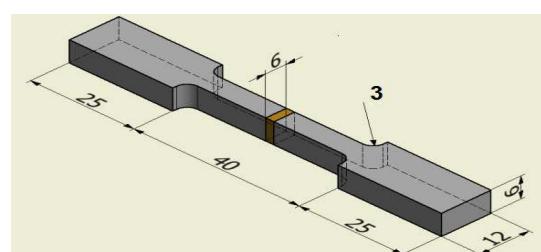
Dimensions of Tensile Test Specimen in mm.
